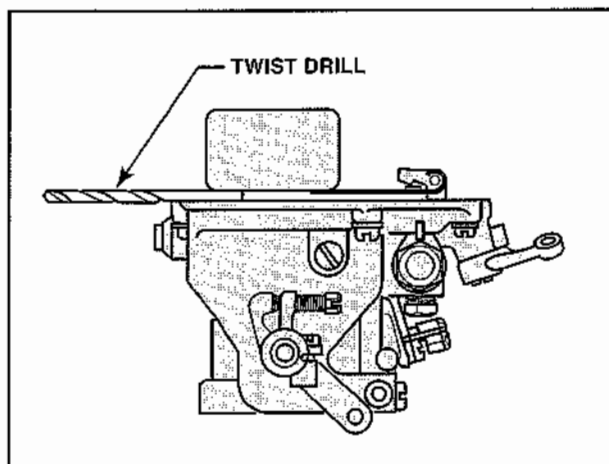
The float clearance on some carburetors is measured with a ruler or by inserting the shank of the proper size twist drill between the gasket and float with the throttle body inverted.
